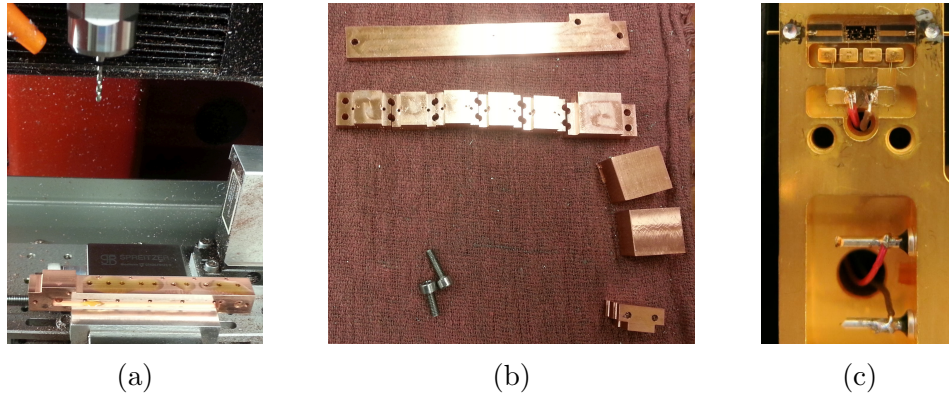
LNA manufacturing and assembly. (a) Milling copper body piece on CNC, (b) copper body pieces before gold plating, and (c) assembled single cavity.
